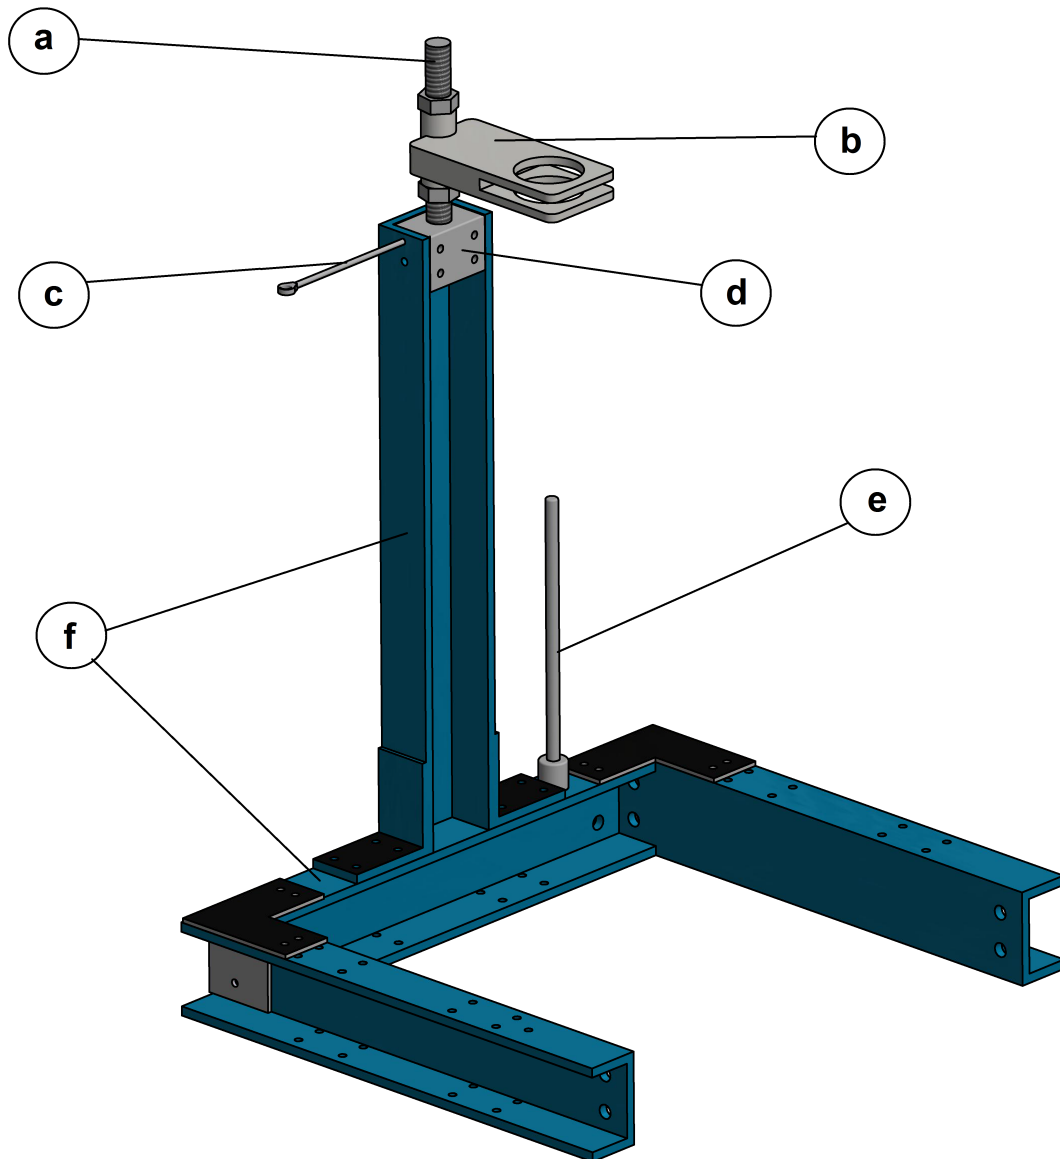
Stand. a) Threaded rod and nuts for adjusting the height of the hydraulic cylinder. b) special holder for holding both the hydraulic cylinder and the spring housing. c) Steel rod for holding liquid nitrogen reservoir. d) steel block for attaching the threaded rod to the frame. e) steel rod for attaching extra utilities. f) steel beams forming the frame.
